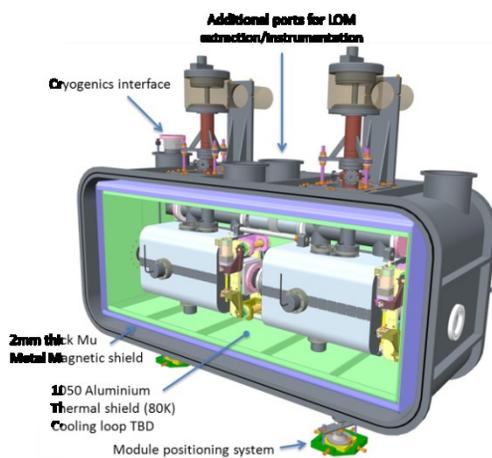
Side loaded cryomodule with full access to internal components after assembly and installation.
